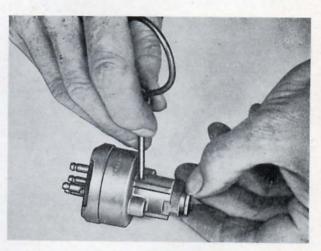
Withdrawing the starter switch barrel whilst depressing the spring plunger with a tapered-off piece of kin. diameter wire
